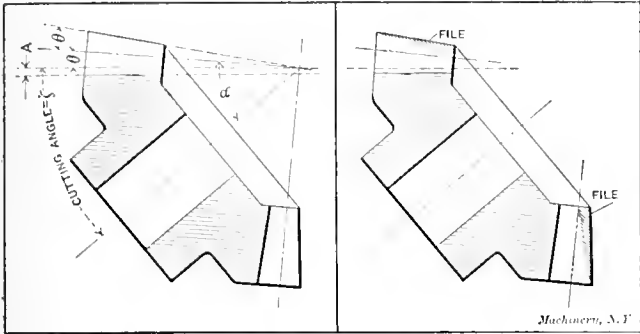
Parallel Clearance, best adapted to shaping with Formed Cutter. Fig. 5. Shaded Area shows Part of Tooth to be corrected by Filing.
